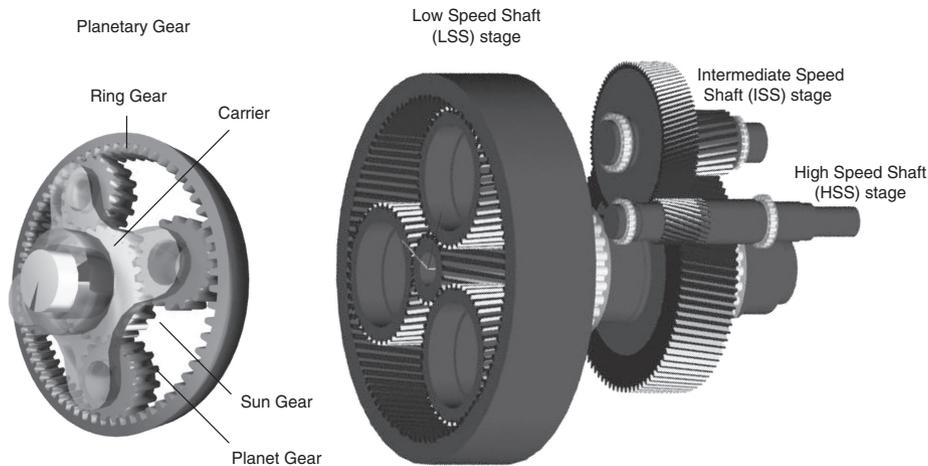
Three-stage WT gearbox with one planetary and two parallel stages.
